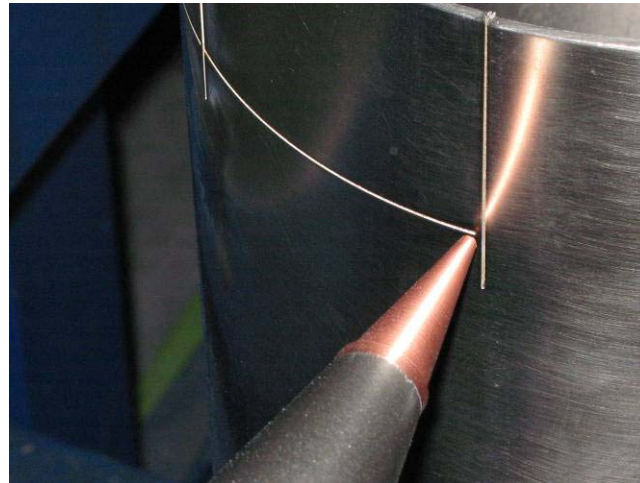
The Zirconium alloy tube was cut with very high speed of 6m per a minute, and cut-width was as narrow as 0.25mm more or less. Surface condition of the cutting edges is very beautiful and very smooth and slightly narrower than the Stainless steel cases.
